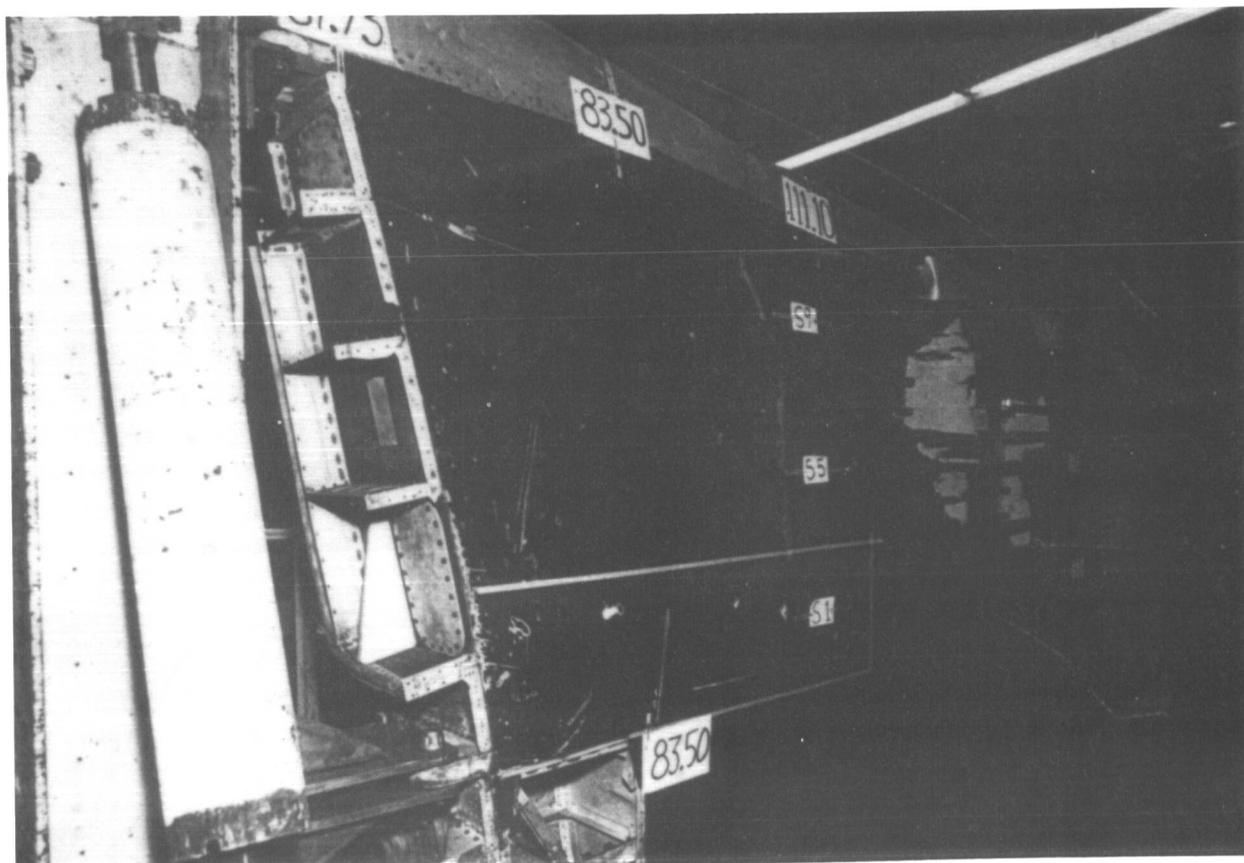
B. Stabilizer Mounted for Inspection, Lower Surface
